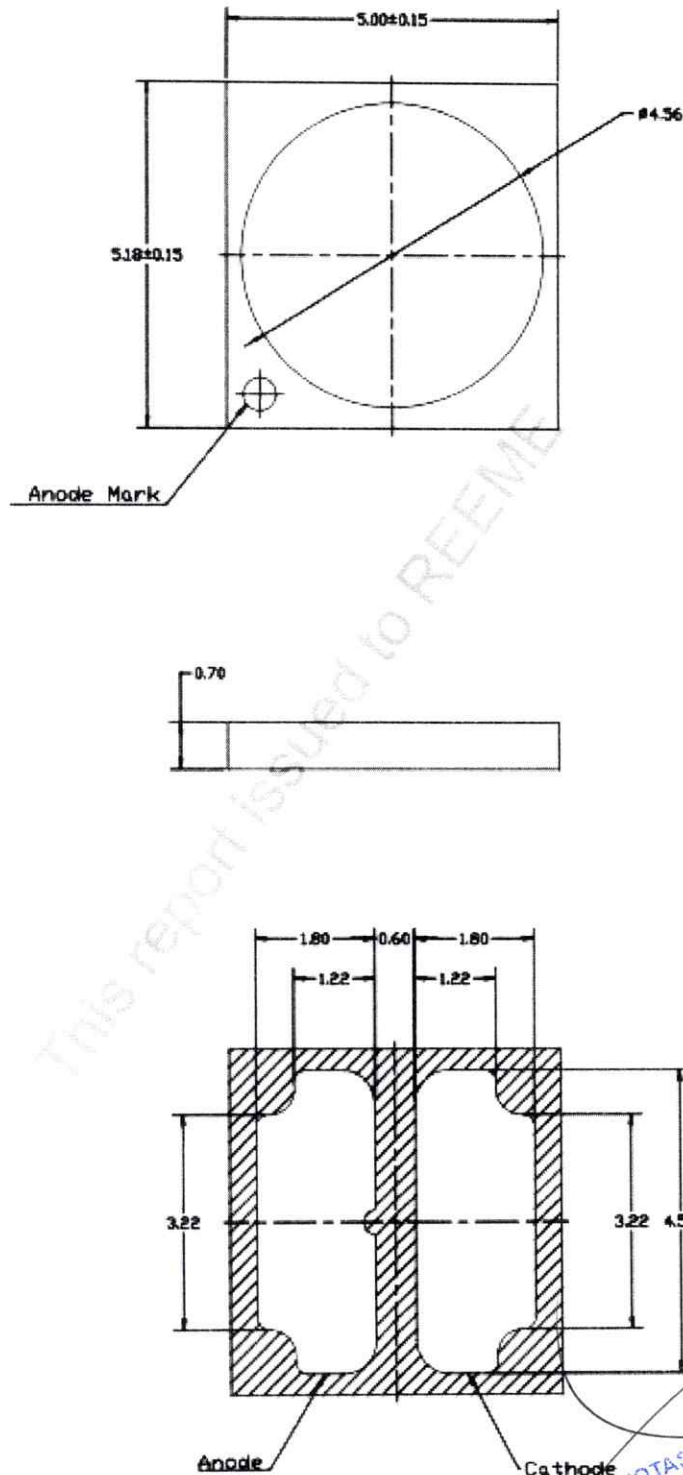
Mechanical drawings for the LUXEON 5050 (all dimensions in millimeters).
